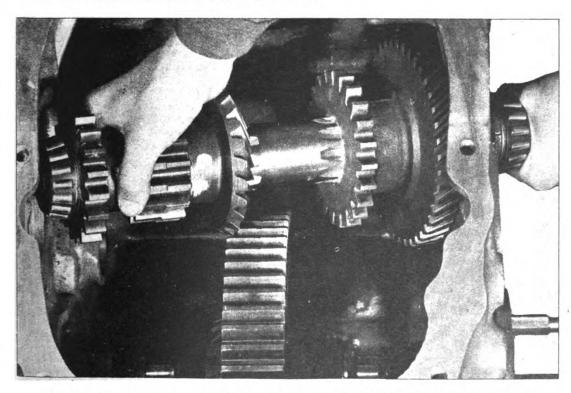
Removing First Reduction Shaft Complete with Gears and Bearings
